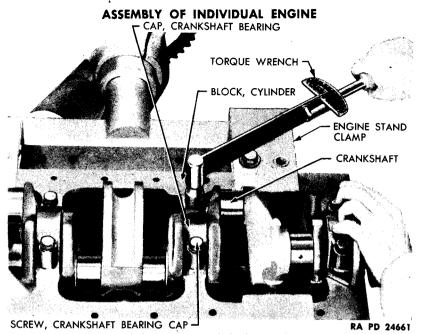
Tightening Crankshaft Bearing Cap Screws
